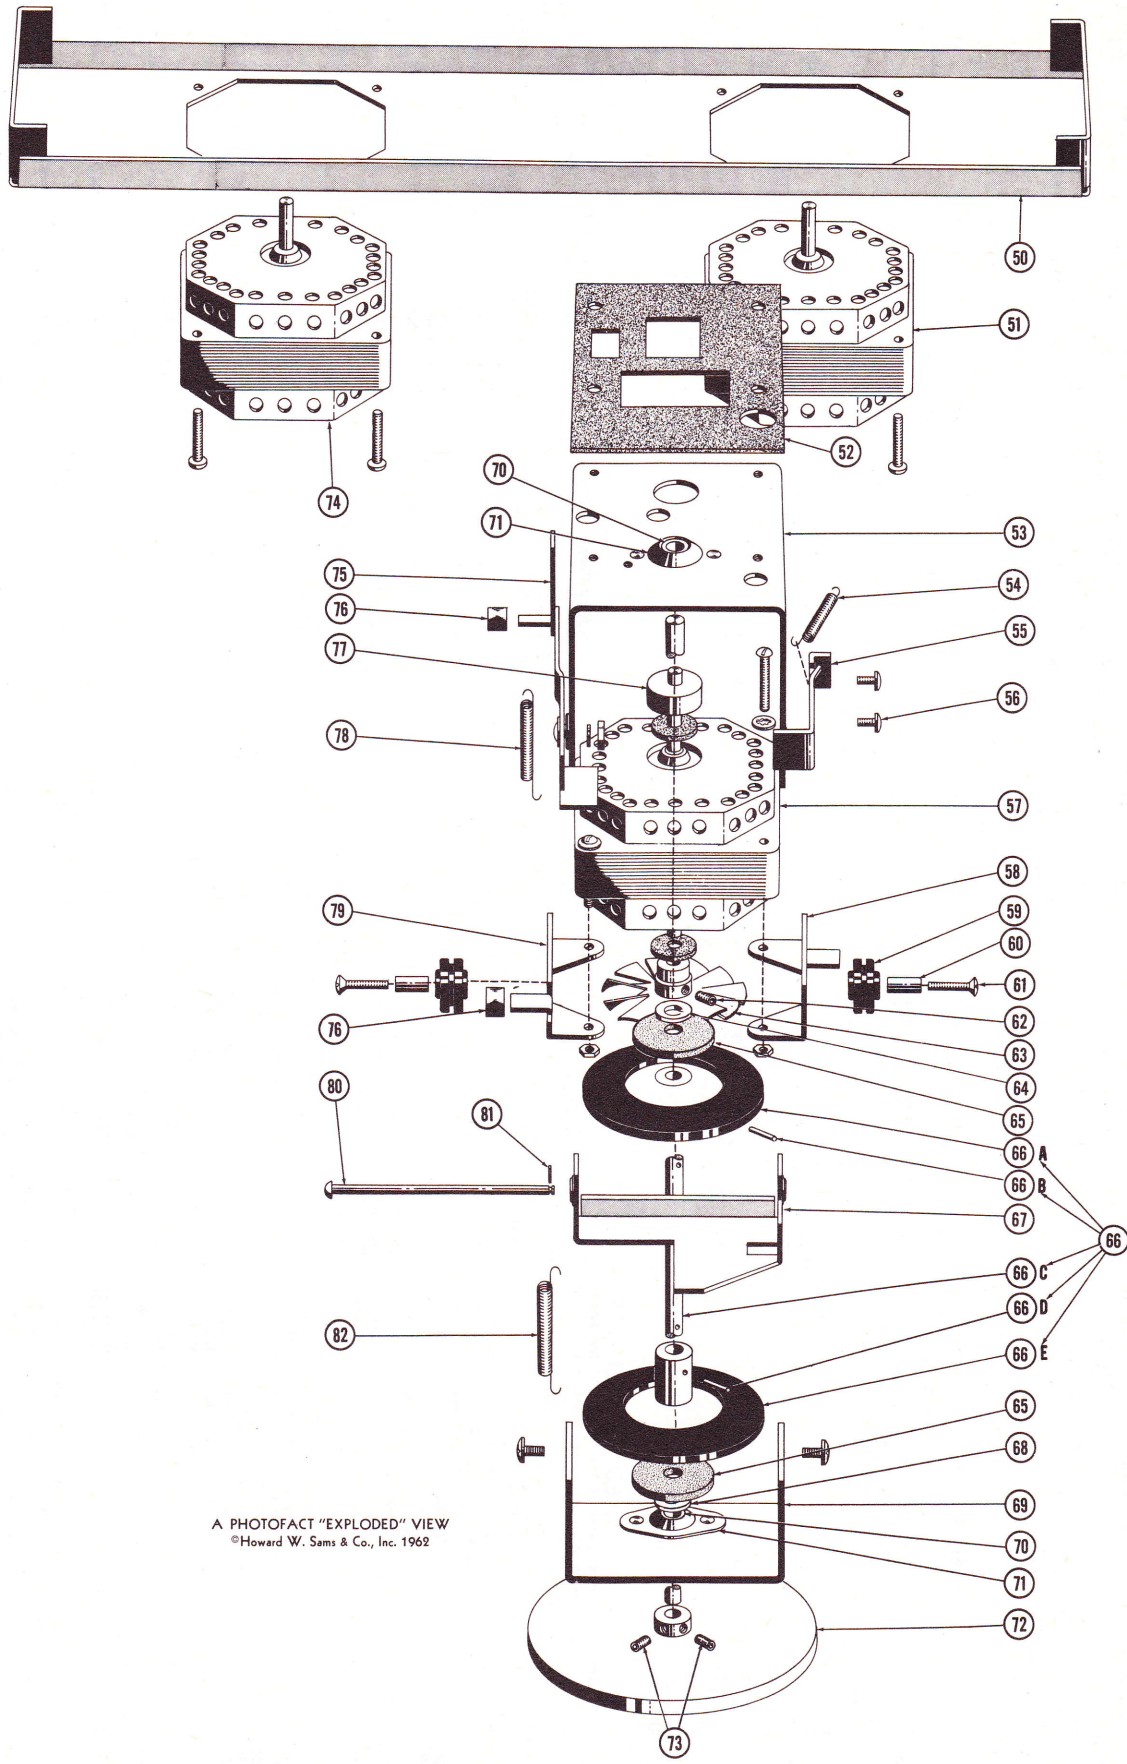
A EXPLODED VIEW OF PARTS ABOVE DECK ASSEMBLY
